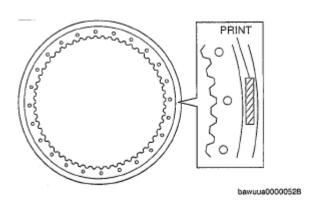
Inspecting Lining Of All Drive Plates Courtesy of MAZDA MOTORS CORP.
